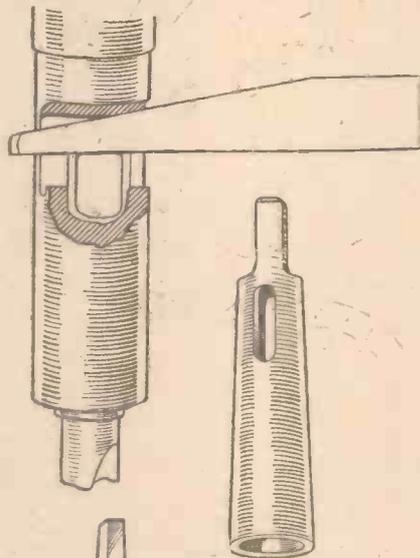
Drill for Morse taper socket, and Morse socket adaptor.
